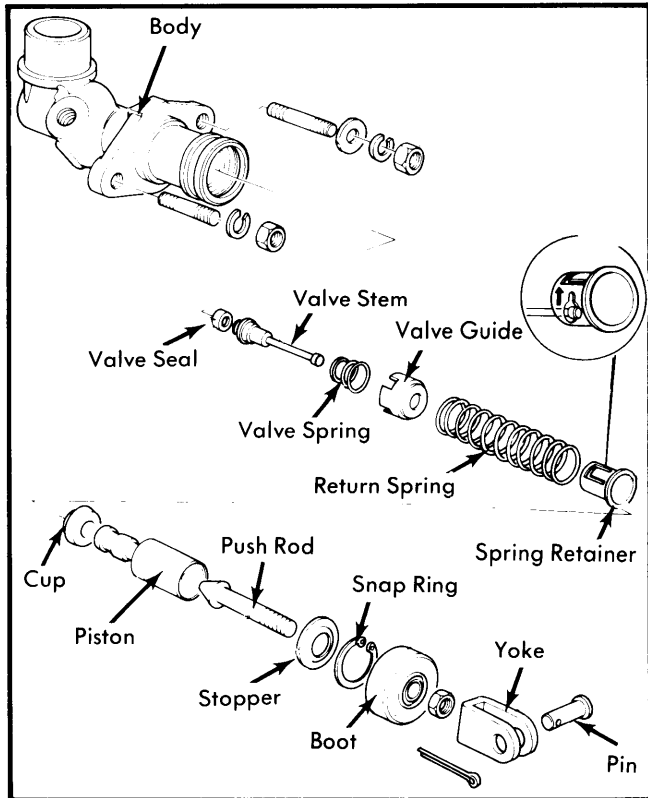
Exploded View of Accord Master Cylinder. Prelude Cylinder is Similar Except Fluid Reservoir Is Separate From Cylinder Body
